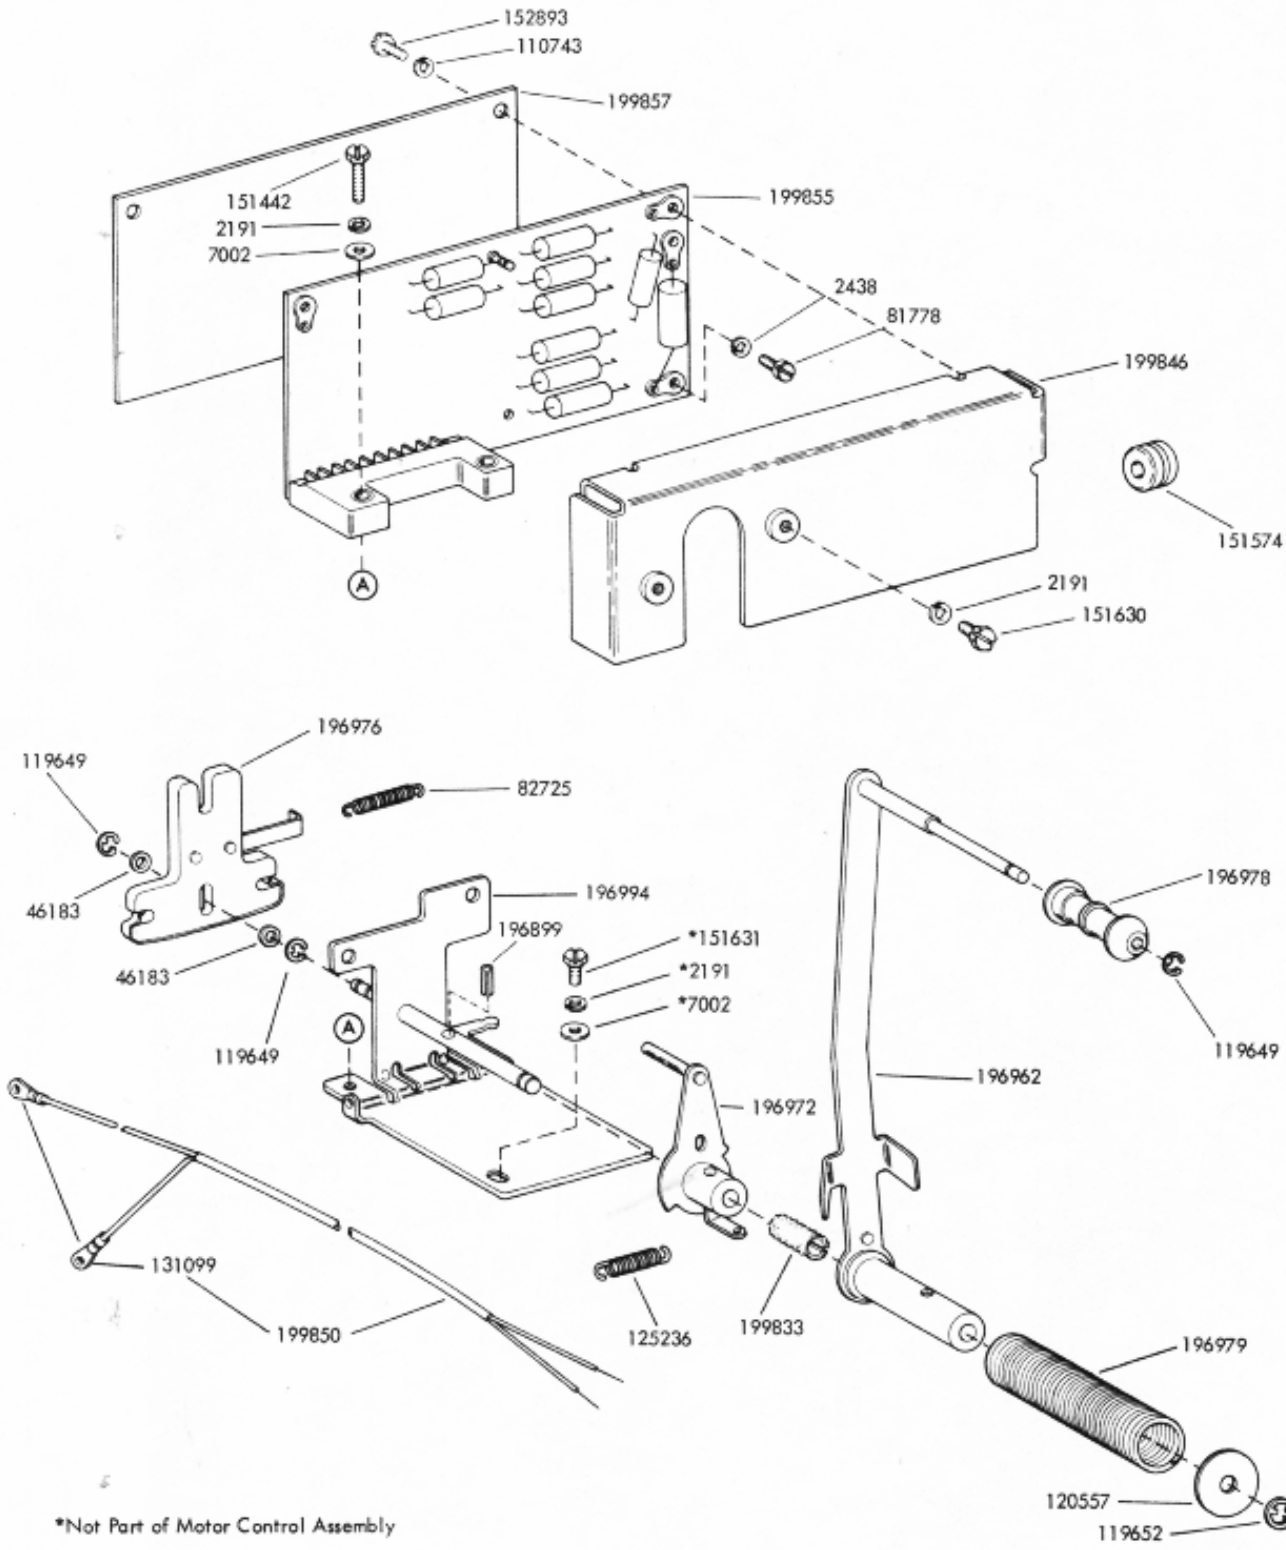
196937 TAPE PULLER ASSEMBLY
